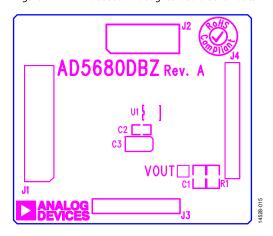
EVAL-AD5680DBZ Daughter Board Component Placement
